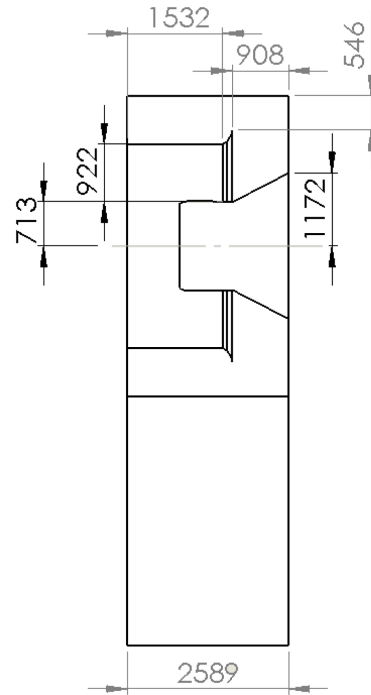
Final Hood Geometry Dimensions through Cutplane [mm]
